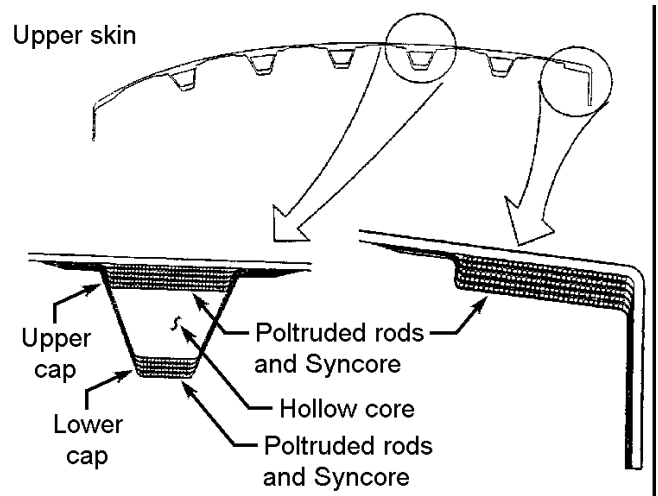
Pultruded rod packs for stringers and corner flanges (from Ref. 7).
